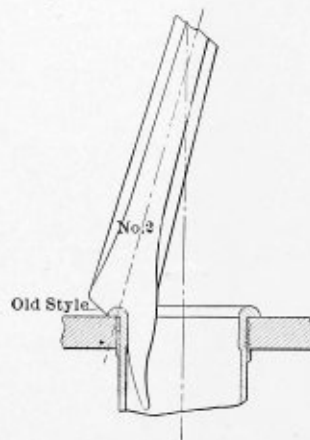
OLD-STYLE BEADING TOOL WITH SHARP HEEL.
